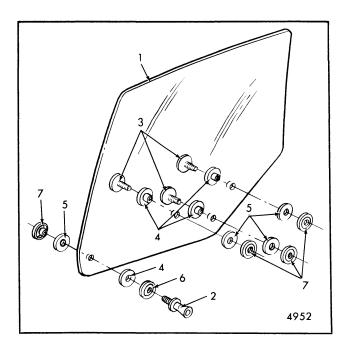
Rear Door Window Assembly - "A-29,35" Styles
